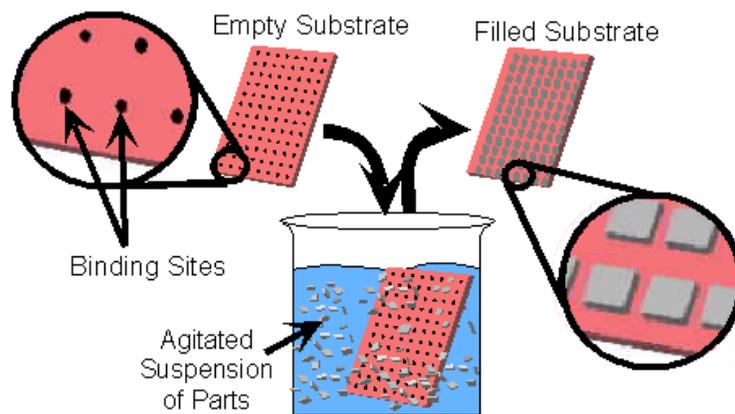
The basic fluidic self-assembly Process. One set of parts can generate only one assembly.
